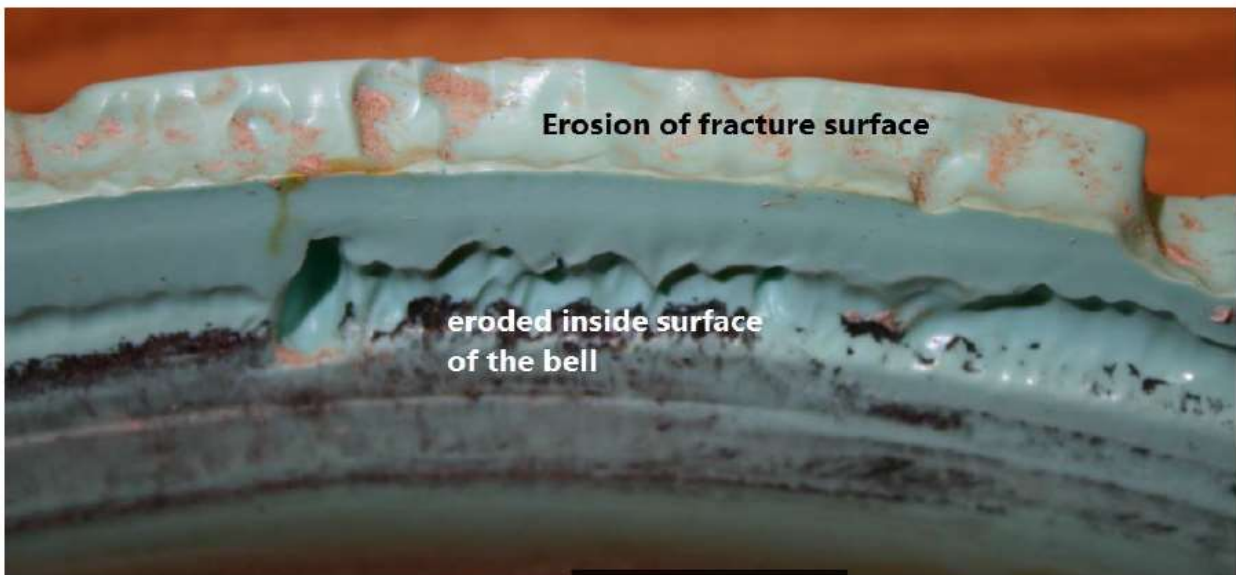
Erosion of the inside of the bell and the fracture surface by the water leaking passed the gasket.
